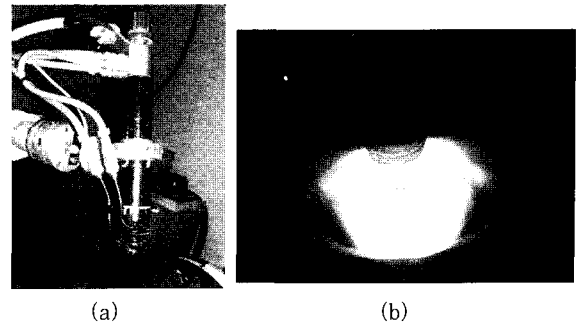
Keyhole TIG welding (a) Torch (b) Keyhole
